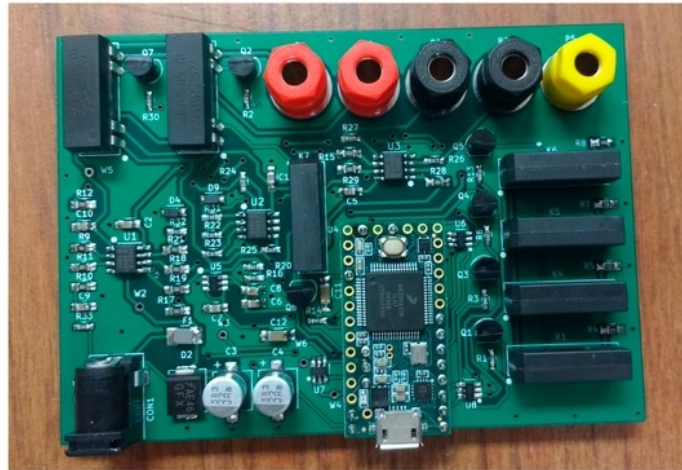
Assembled open source printed circuit board for four-point probe measurements.
